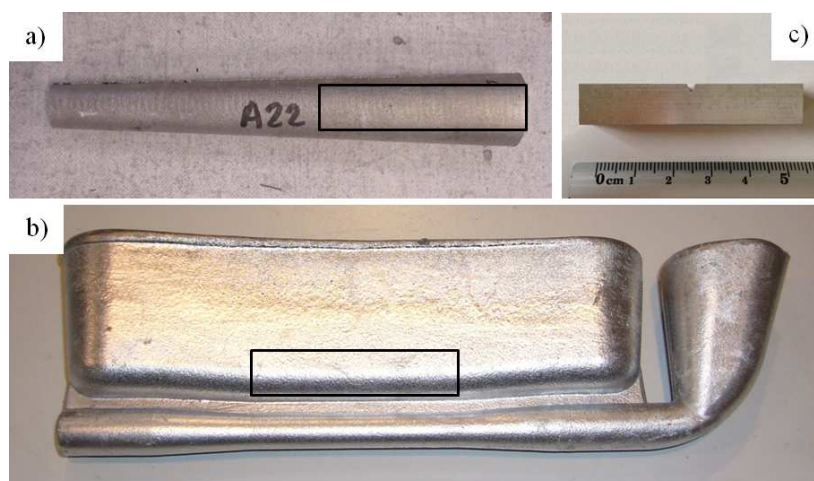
Castings obtained from: a) sand mould; b) permanent mould. The black rectangles mark the areas where the Charpy specimens c) were machined.
